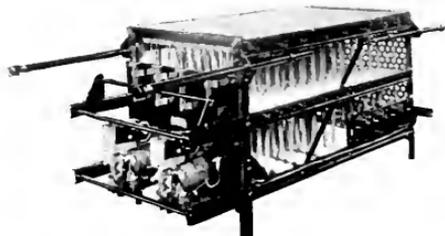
Portable Arc Welder Resistor Unit with Control Panel
